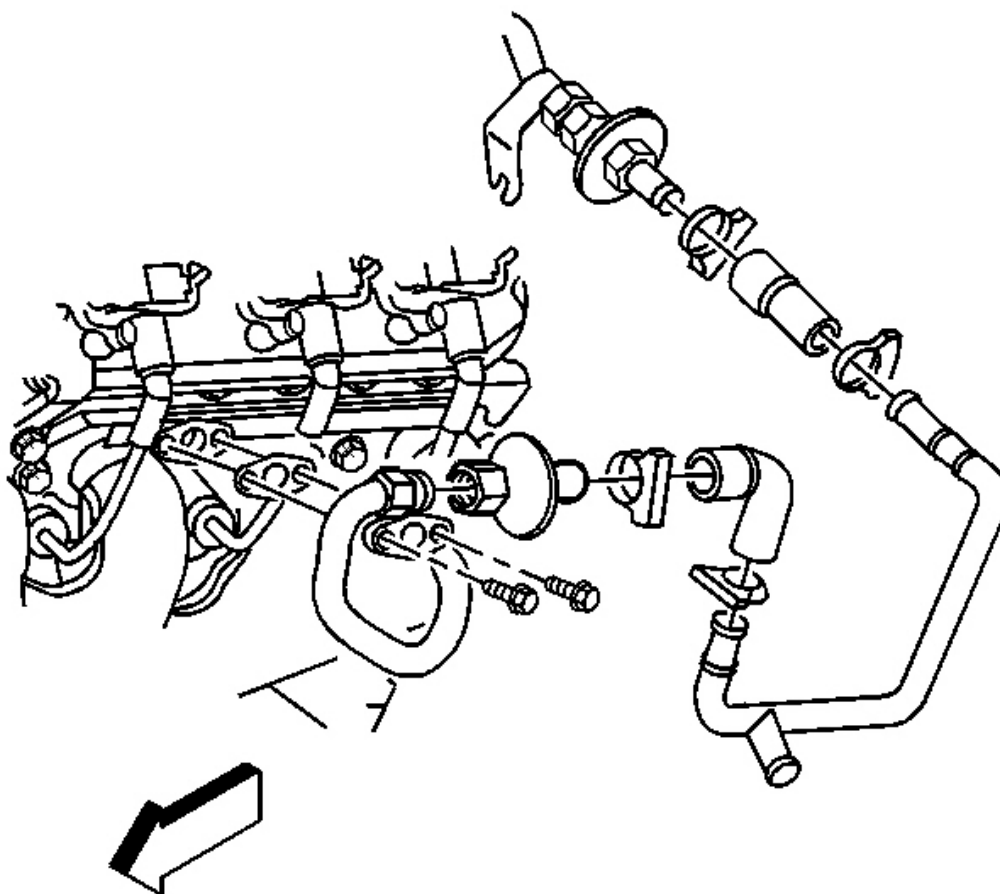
Air Pipe, Check Valve, Bolts & Gasket From Left Exhaust Manifold
